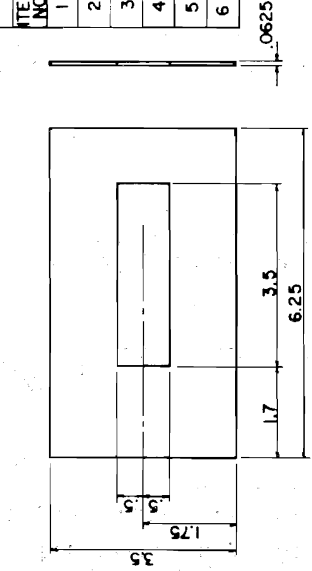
Lateral Expansion Gage for Charpy Impact Specimens.
